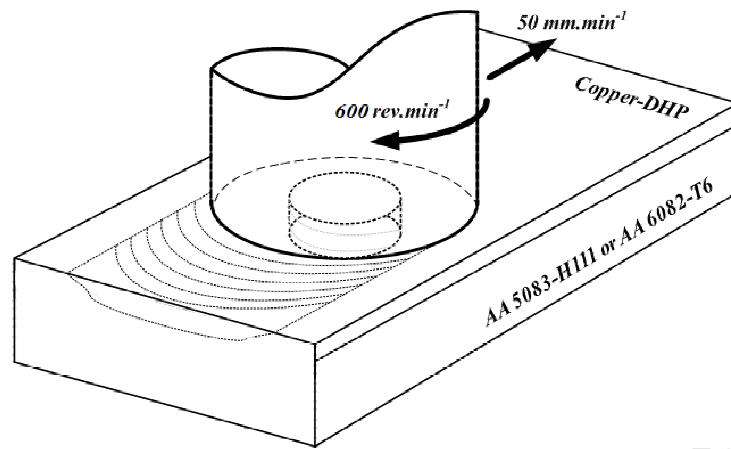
Schematic representation of Al/Cu friction stir welding.
